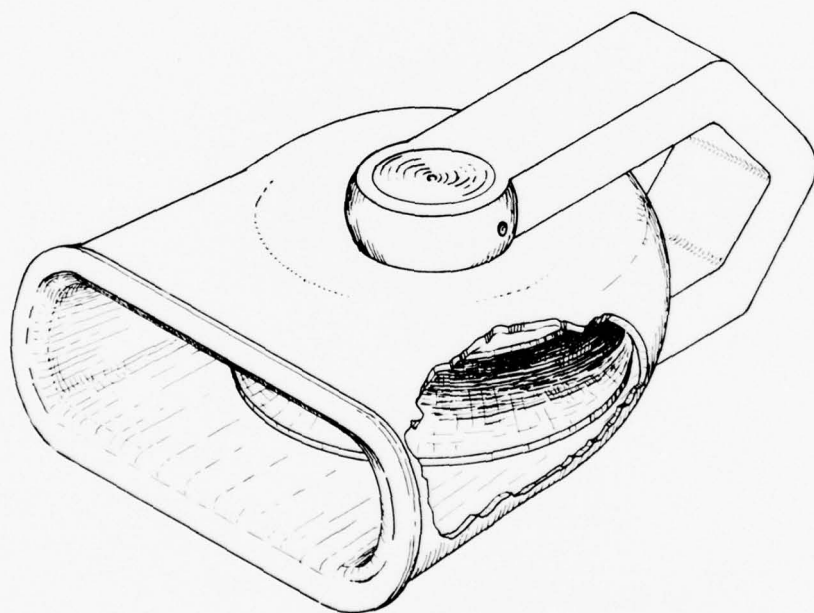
EXAMPLE OF A BUOY-END HAWSER THIMBLE
